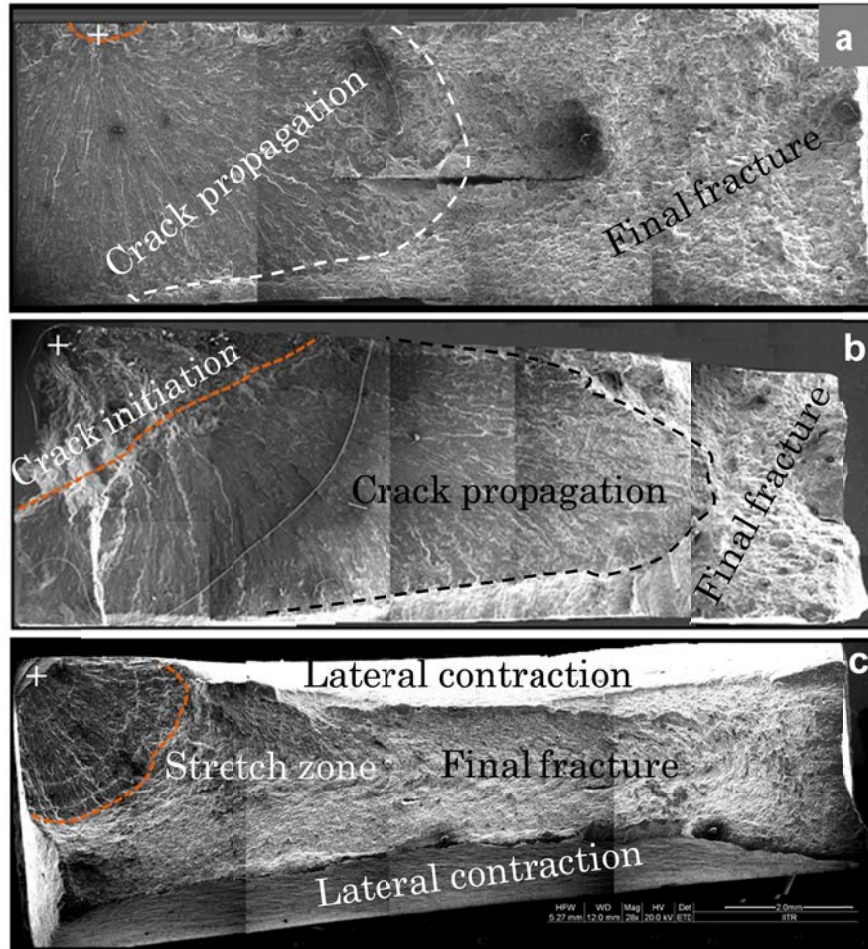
Photograph of fatigue fracture surface of a weld joint
